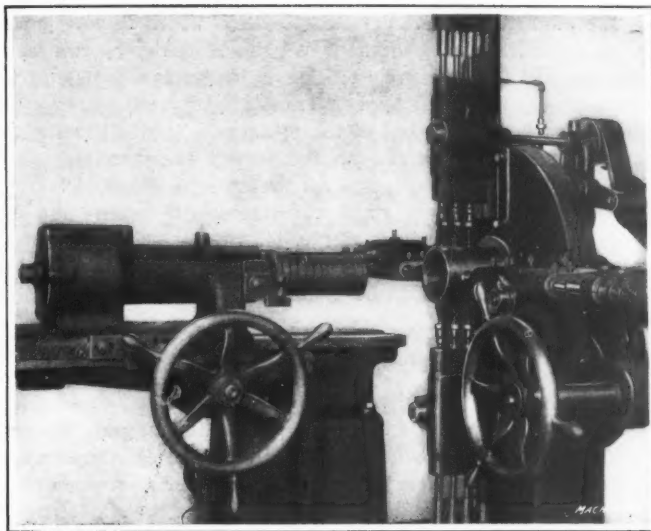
Close View of Mechanism with Drilled Sleeve on Arbor after being withdrawn from Jig
